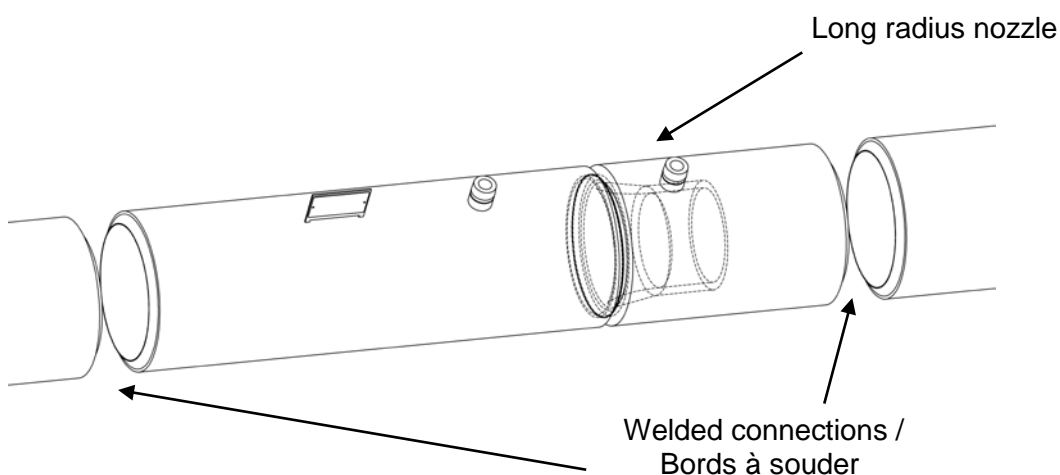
Assembly of a long radius nozzle with welded connections
